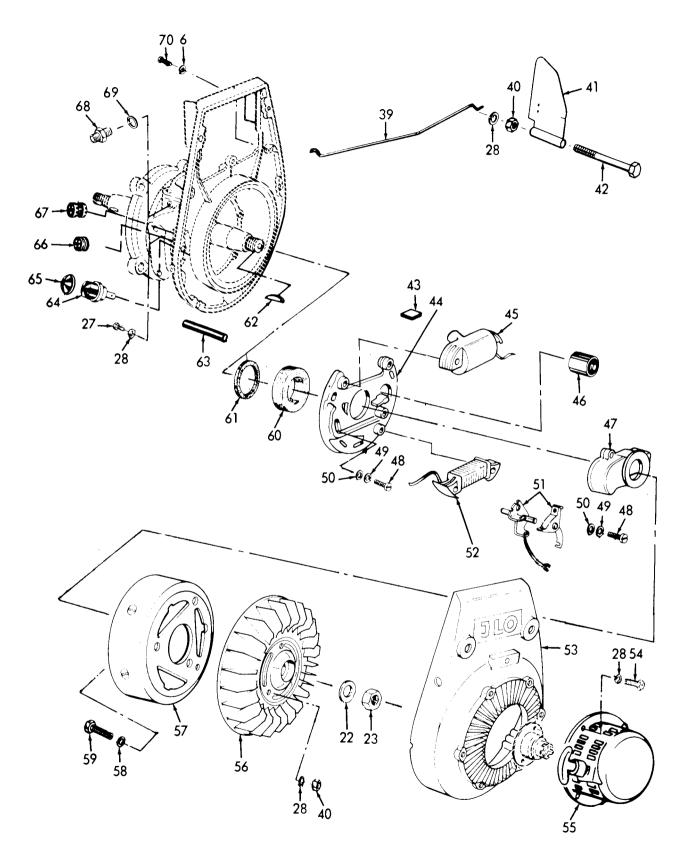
Gasoline Engine Assembly (Sheet 2 of 2).
